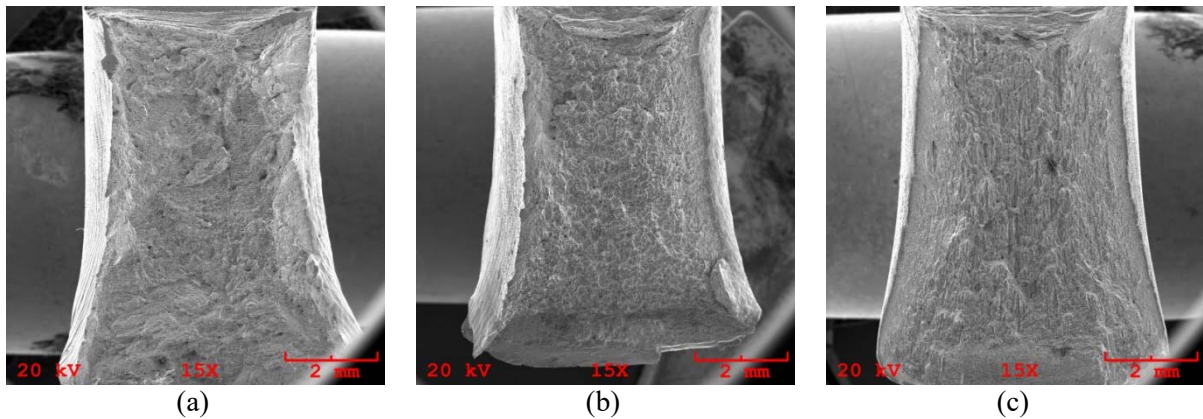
Fractographs showing the general fracture morphologies of weld metal (a), HAZ of C-276 alloy (b) and (c) HAZ of 316L alloy.
